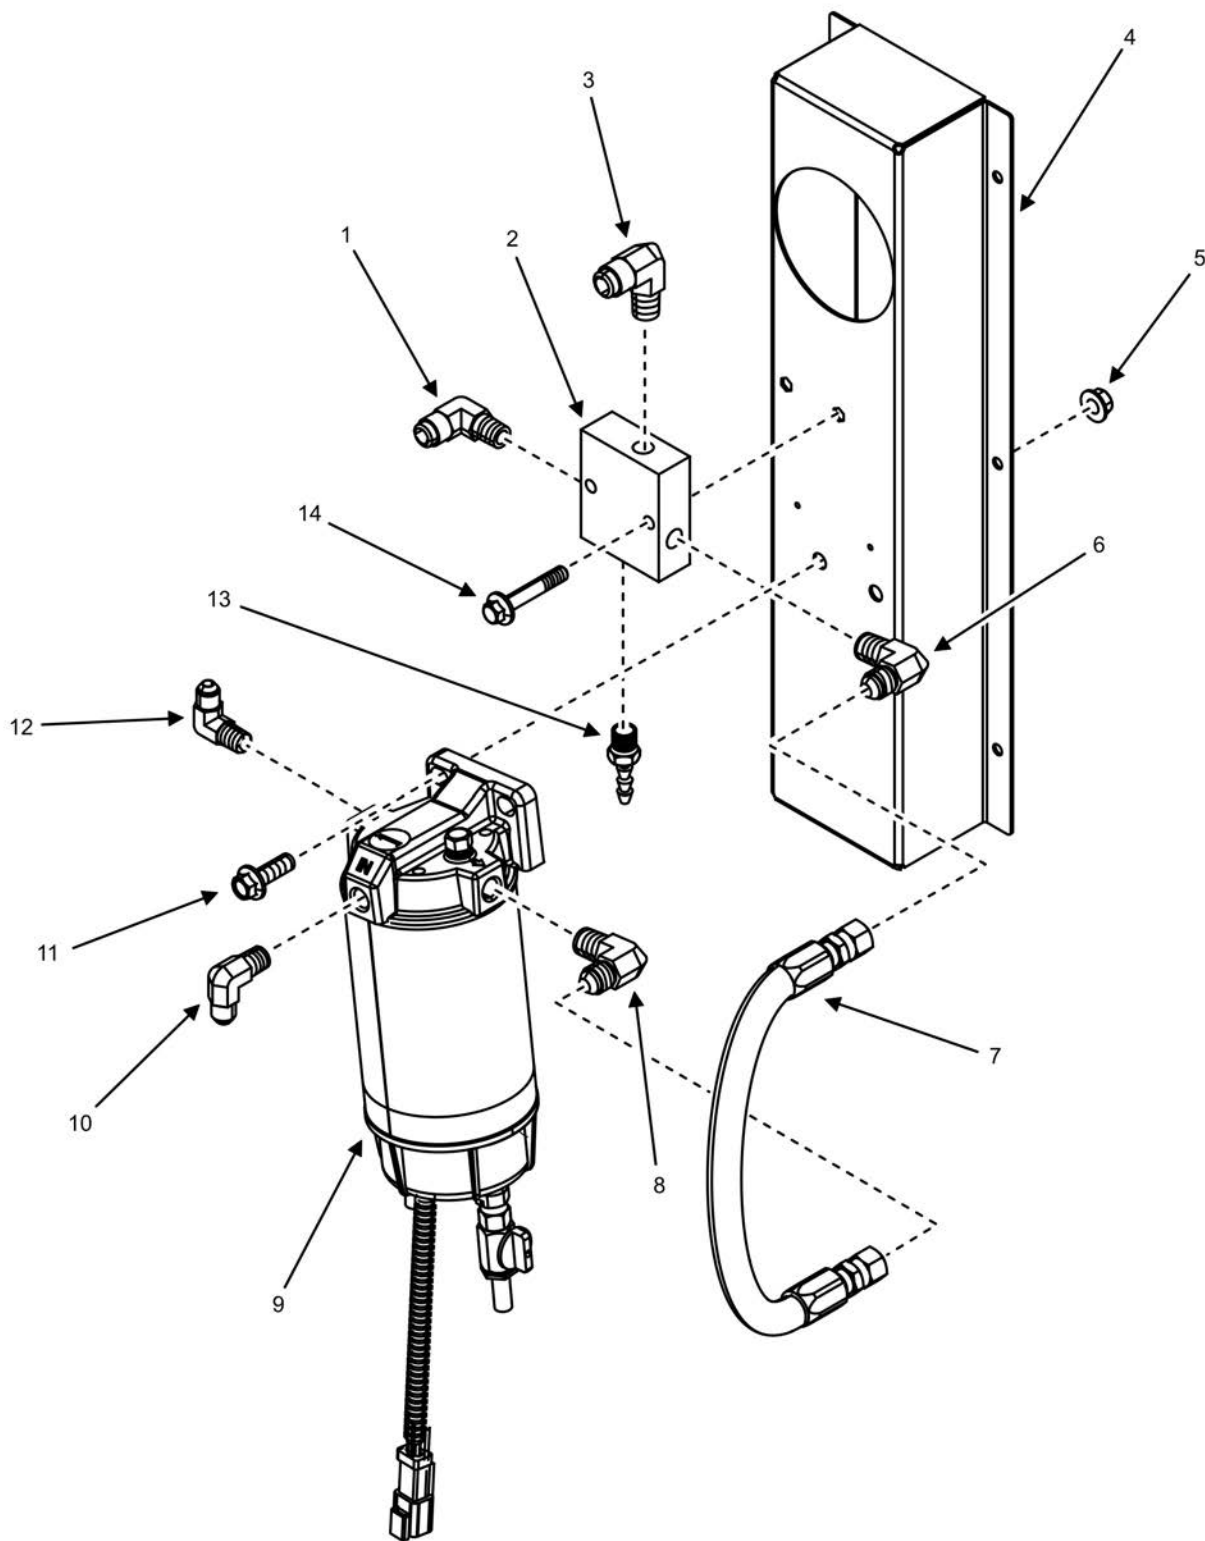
Fuel Filter/Water Separator Assembly — Removal.
